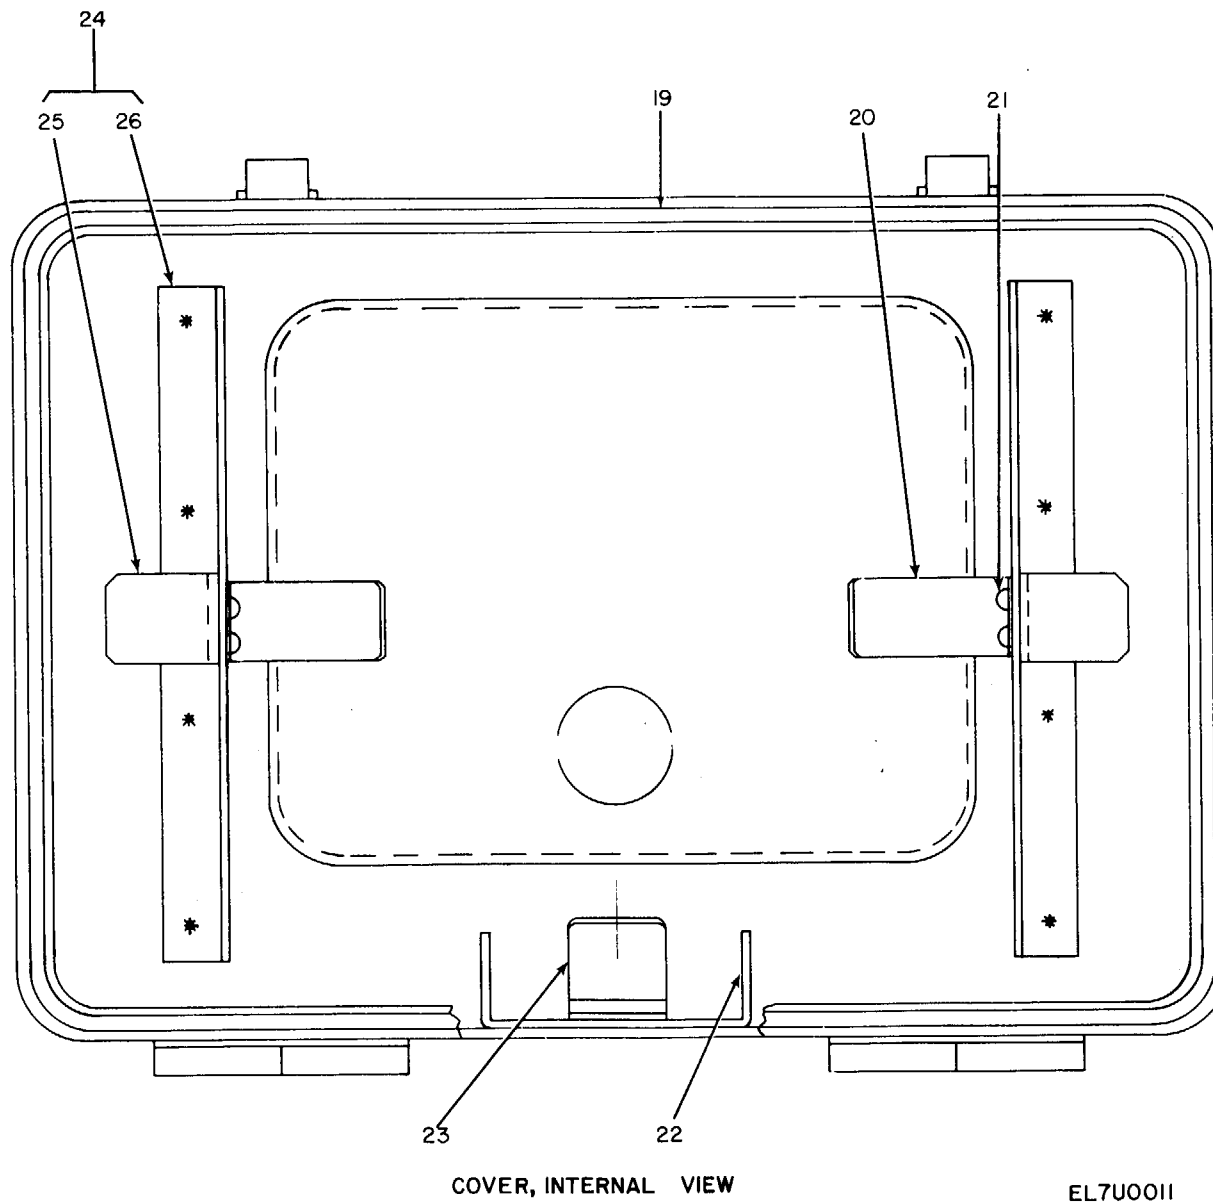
Case Assembly, Charger (Sheet 3 of 3).
